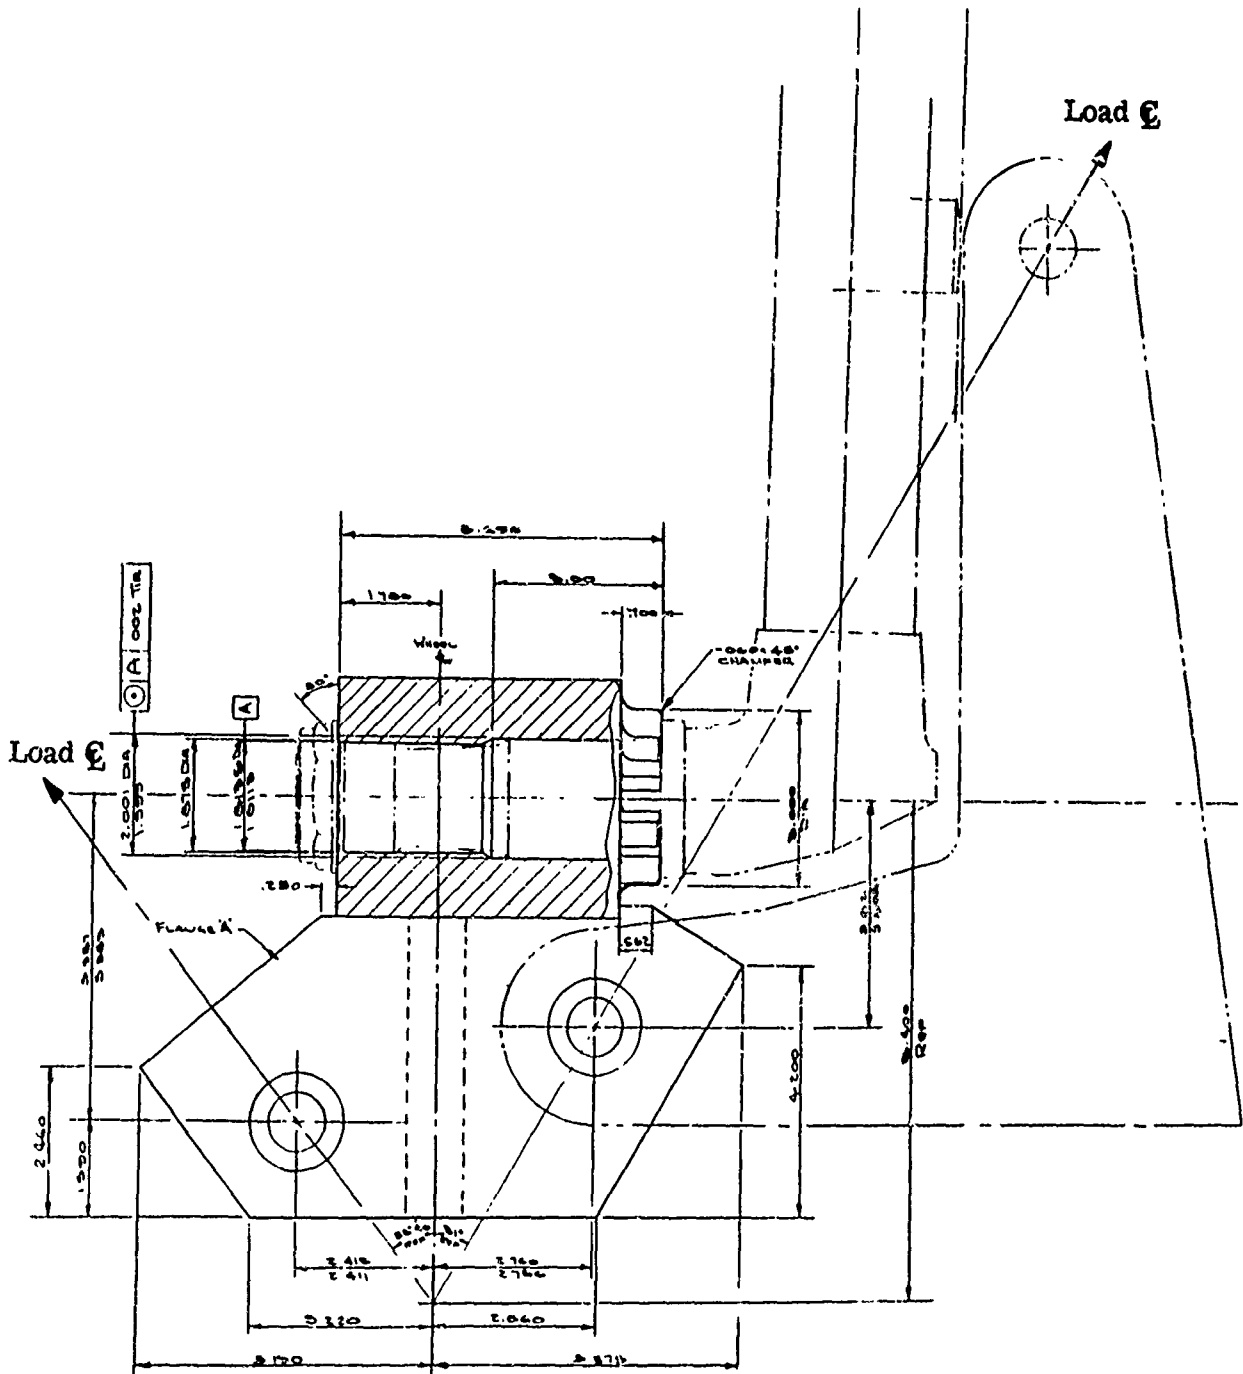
Static Load Fixture, Wheel Simulator, Looking Aft
